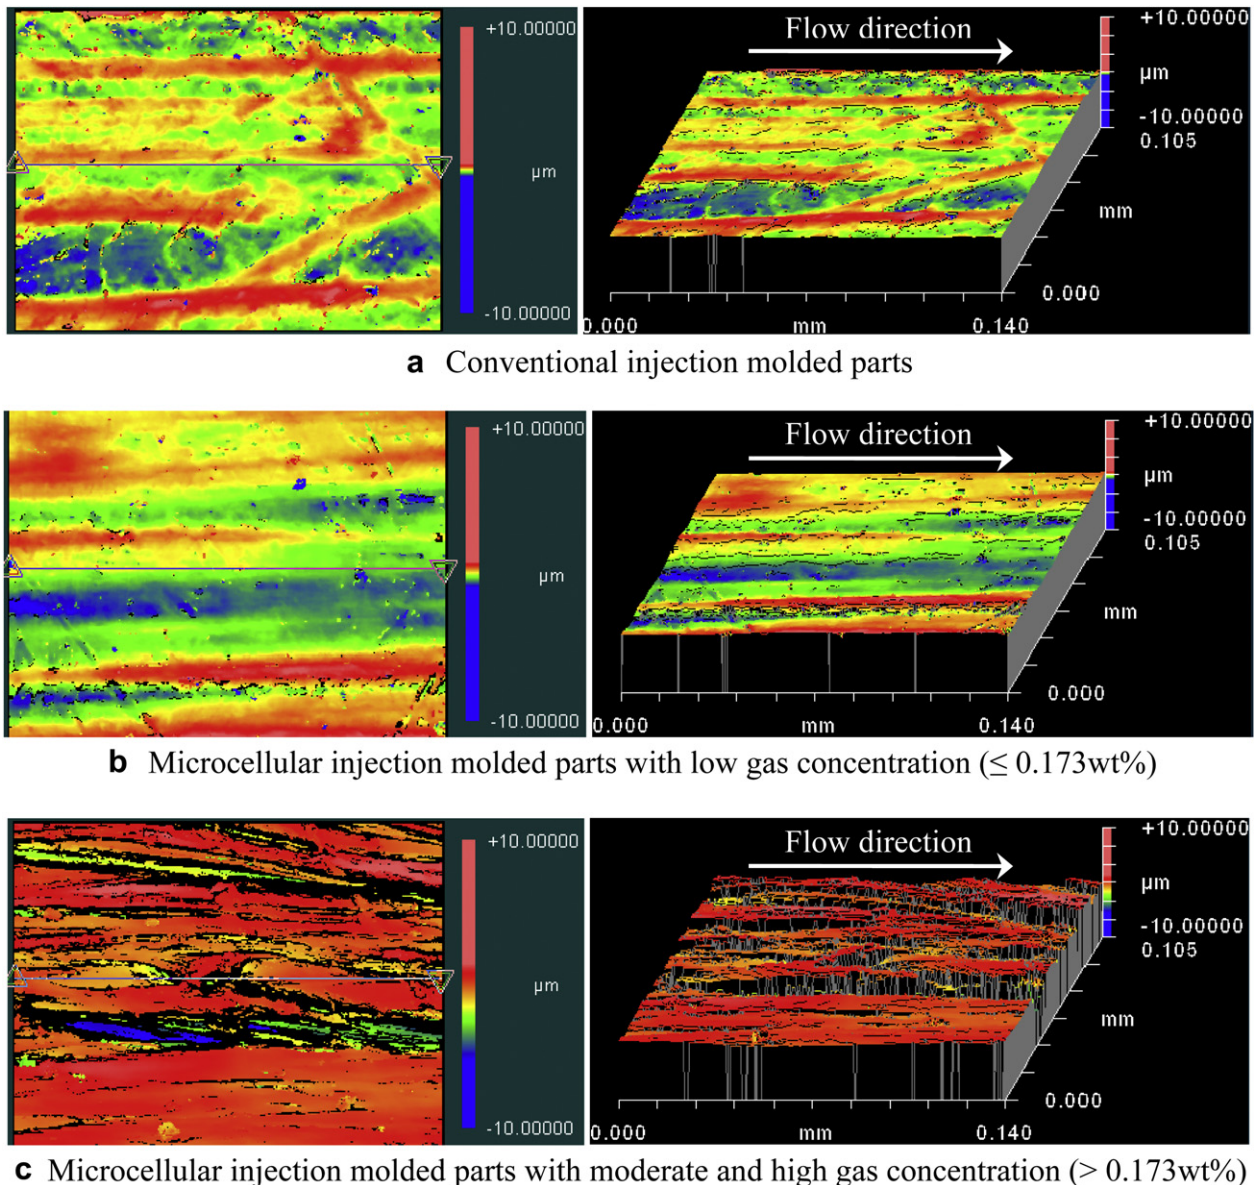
Representative surface profiles of LDPE injection molded parts.
